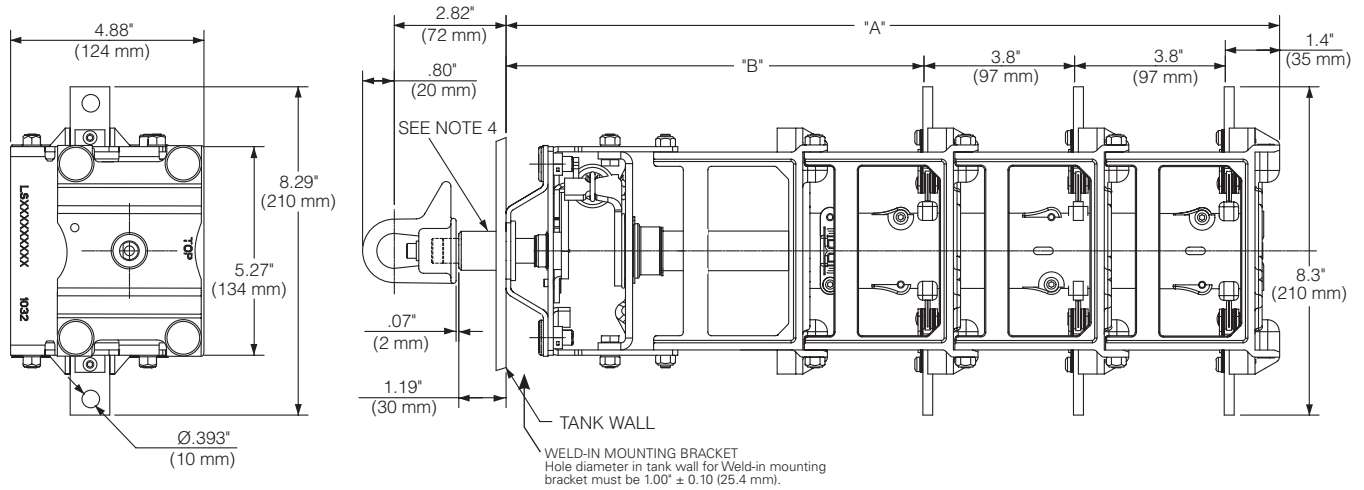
Line illustration with dimensions of loadbreak switch with "WELD-IN SYSTEM" for horizontal or vertical mounting. (Shown with "Full" deck extension.)
